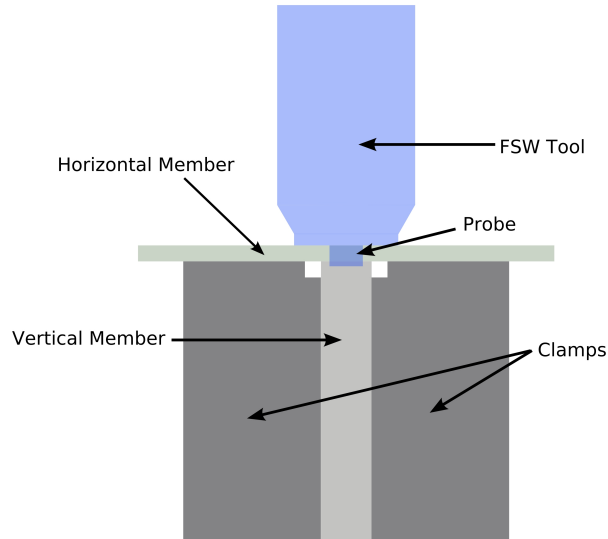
Schematic diagram of T-joint welding configuration used in this paper
